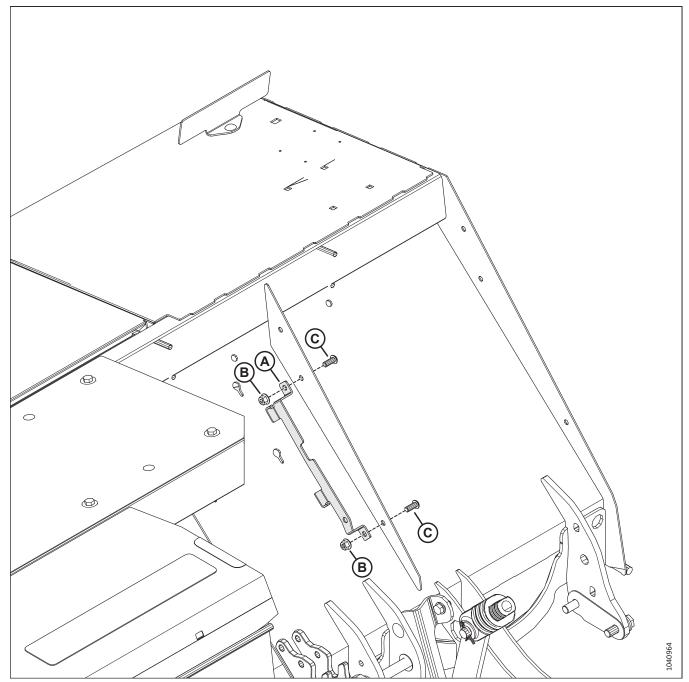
Installation of Quick Change Blade Tool Bracket
